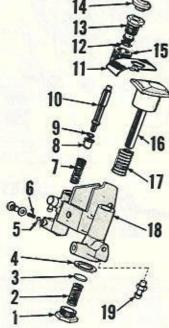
Exploded view of model 177 manual oil pump and fuel primer assembly. Refer to Fig. SK26 for a view of the manual oil pump typical of those used on other models.
